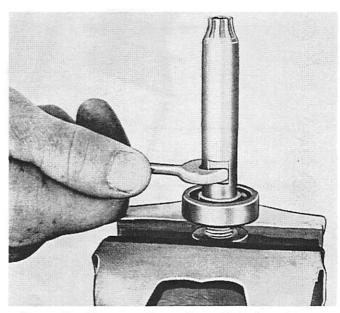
Removing Lower Drive Shaft from Clutch Drum & Bearing
